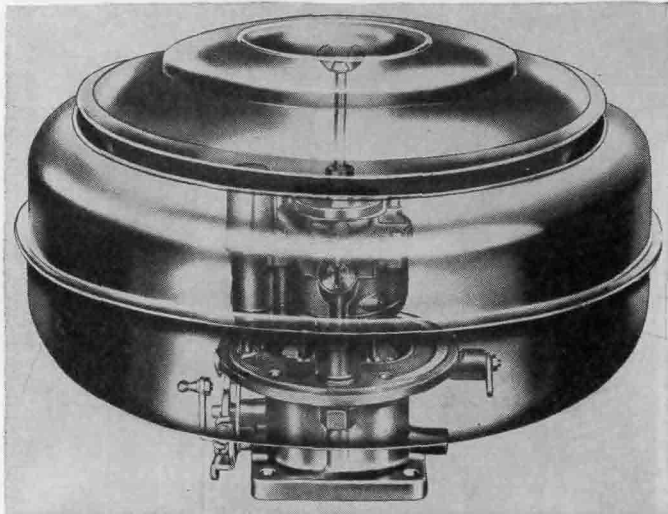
Phantom view showing how air cleaner sits down over the carburetor, so that the main body of the carburetor is actually located inside the air cleaner. (*United Specialties Company*)
